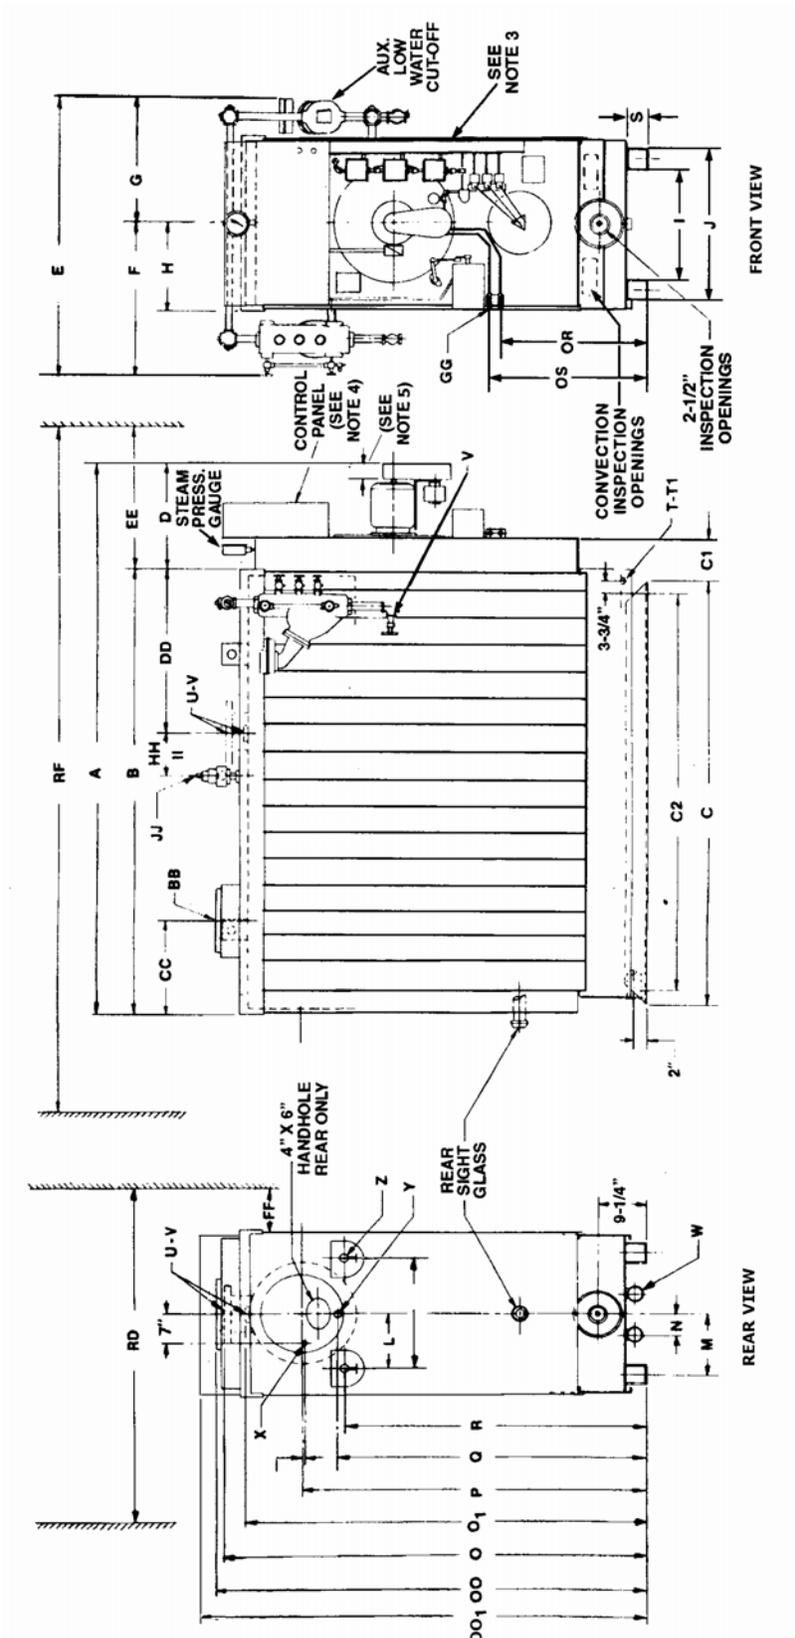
Model 5 Steam Boiler Dimension Diagram
